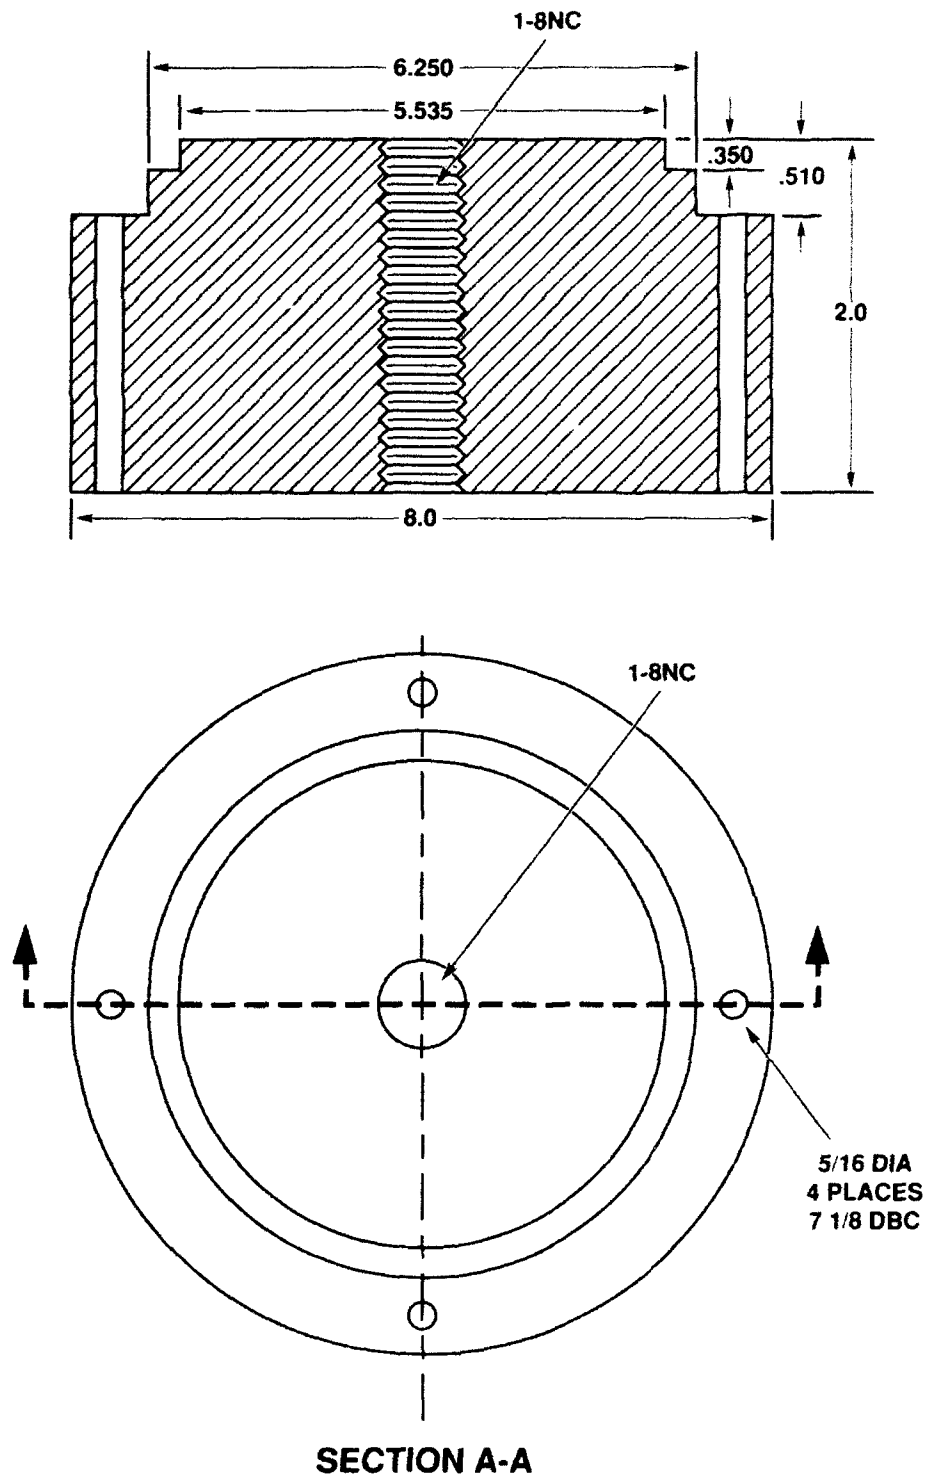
Plane steel bulkhead for Type 1 and 3 cylinders.
